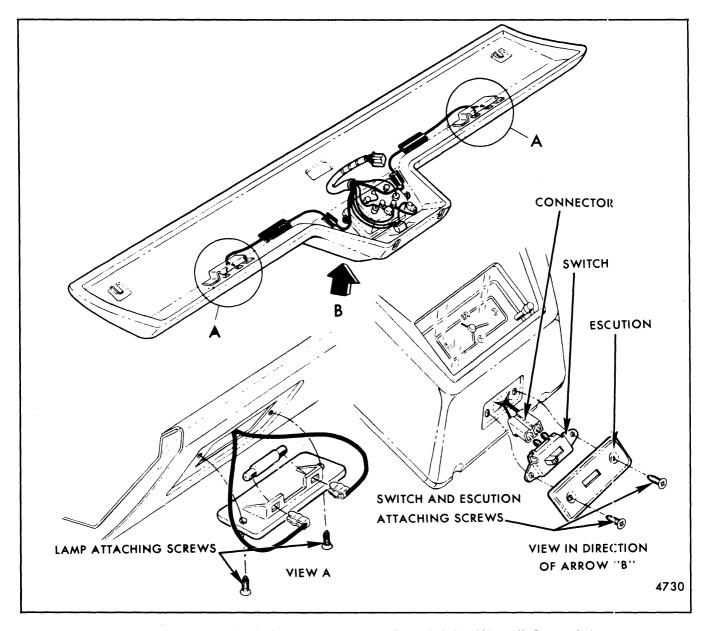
Front Seat Back Clock, Courtesy Lamps and Lamp Switch - Oldsmobile Luxury Sedan
